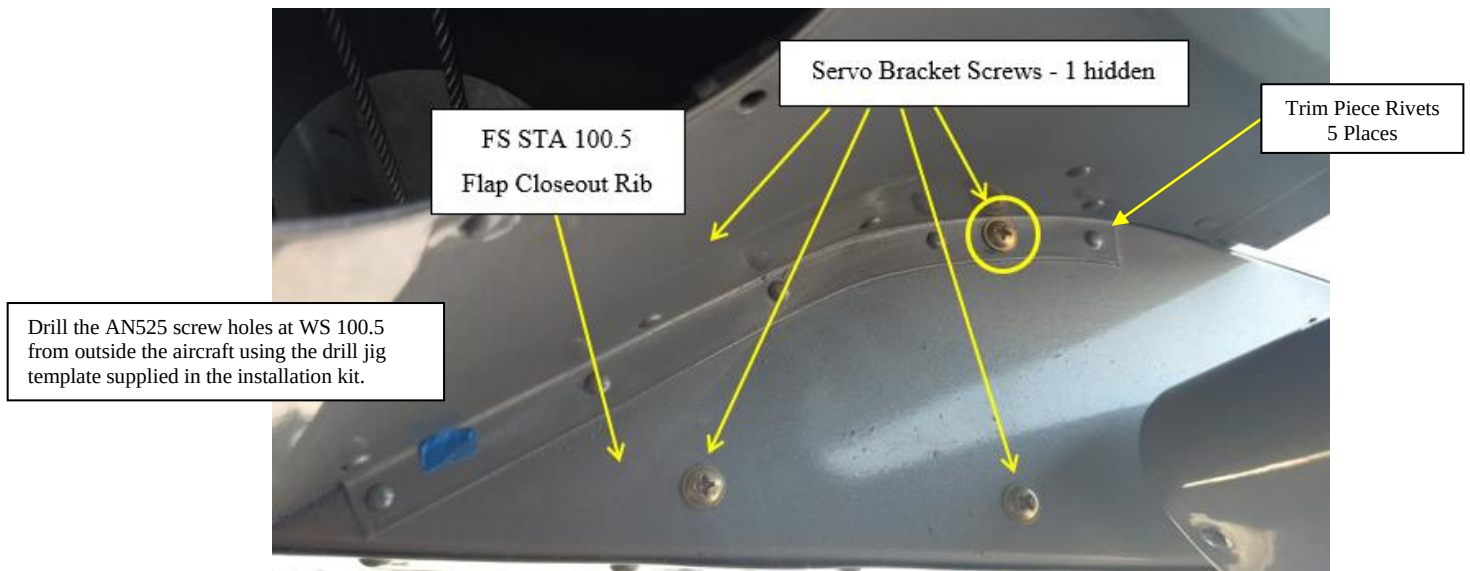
ROLL SERVO MOUNTING PLATE INSTALLATION
